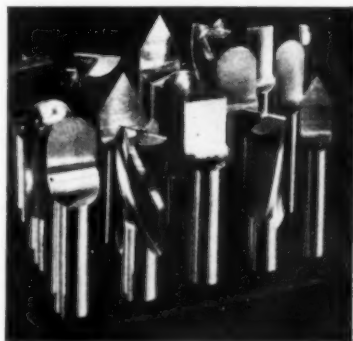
A typical set of cutters for die and mold work, including single flute cutters with square, ball, and conical noses, two flute cutters with ball nose, four flute shear cut mills, and ground tooth burrs.
